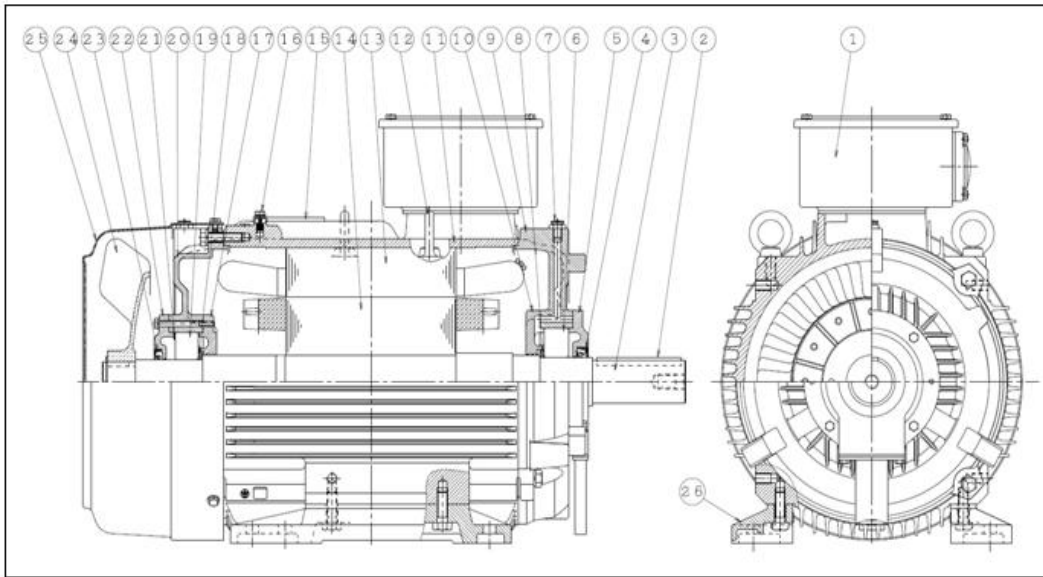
Schematic diagram of a 160 aluminium motor, flange version
